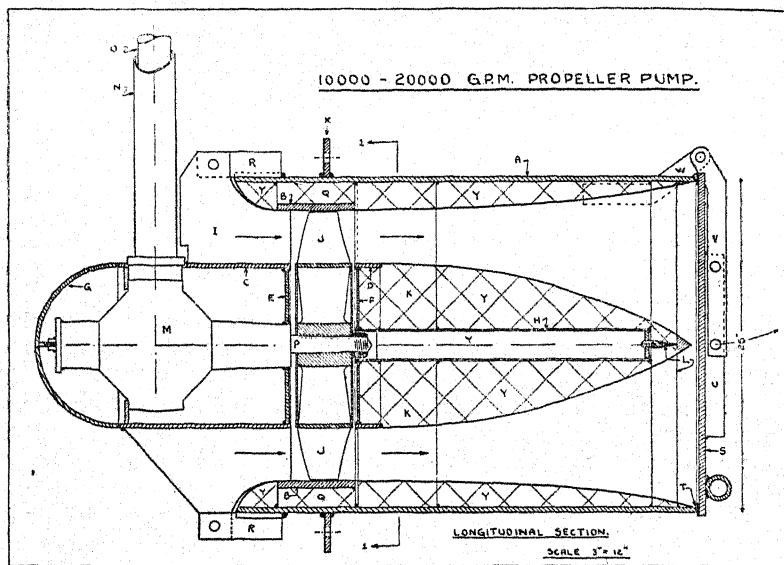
Longitudinal section. 10,000—20,000 gallon-per-minute arc welded propeller type pump. (For legend, see page 1117).
